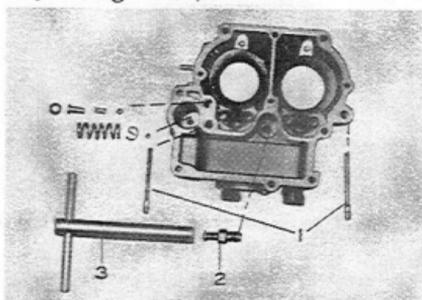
Removing Slow Jets and Power Valve 01908
